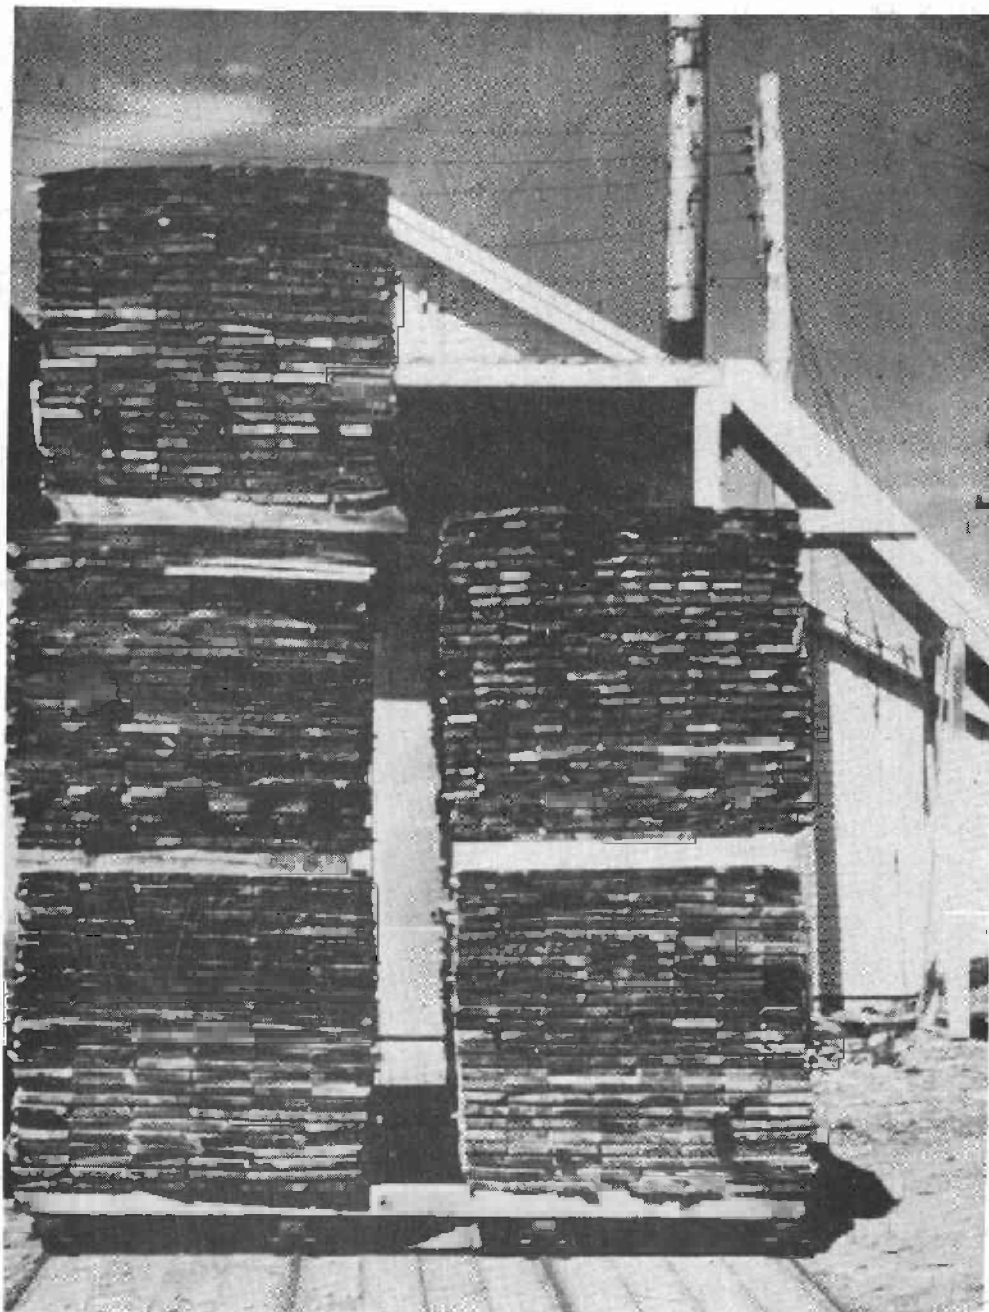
Building up kiln-truck load with unit packages. Sorted-length unit-package piling with straps at ends to hold end sticks. Normal load two unit packages wide, three high.
